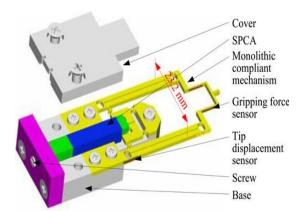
Exploded 3-D drawing of the MCM based piezoelectric-driven microgripper (Wang et al. 2011)
